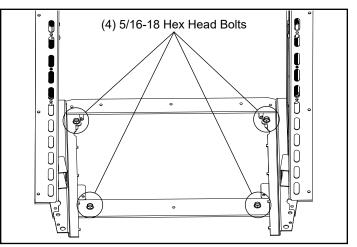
Remove (4) 5/16-18 Hex Head Bolts
